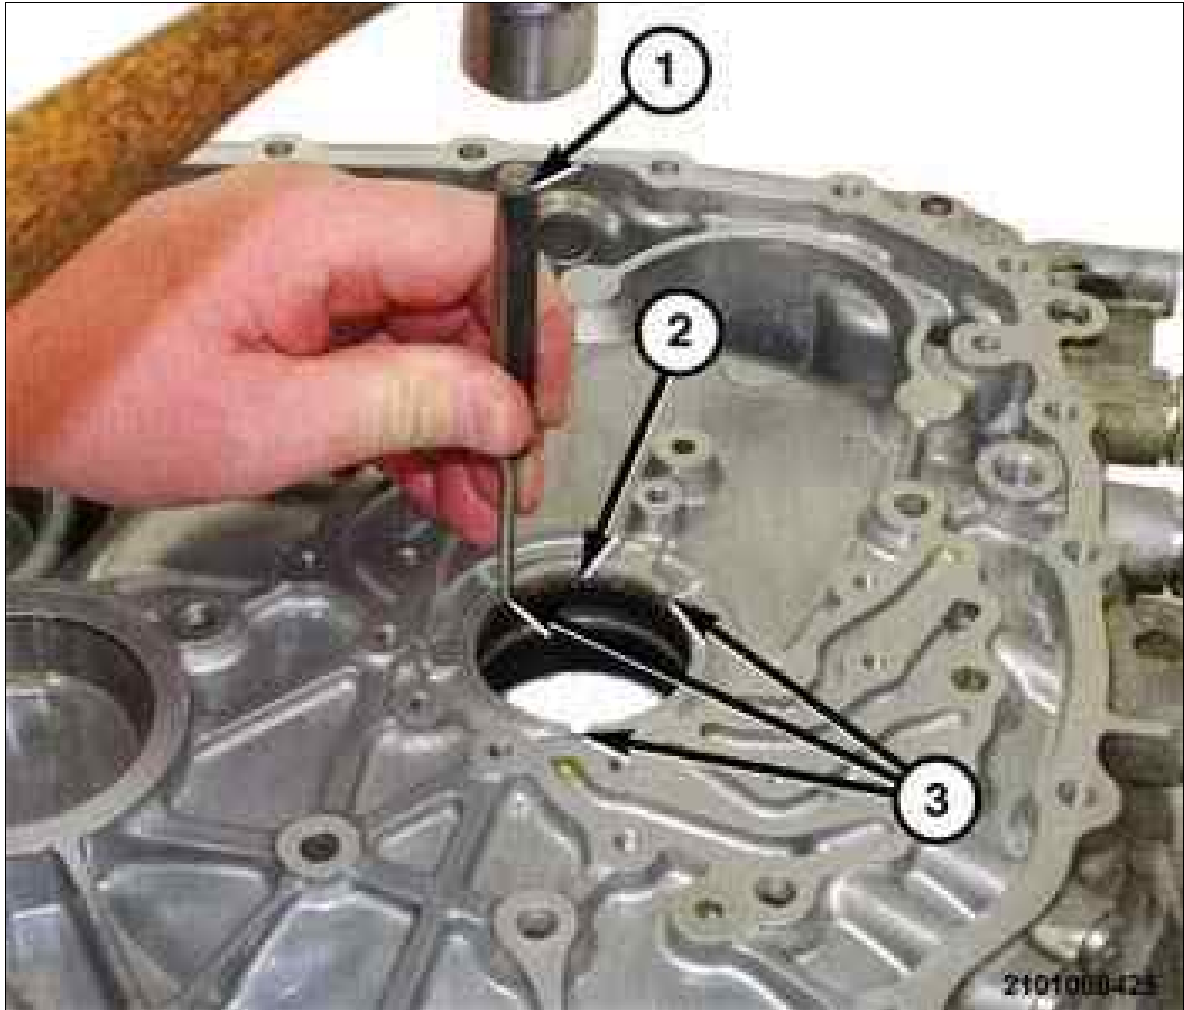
Screw Driver, Snap-Ring & Oil Pump Sprocket Needle Bearing
